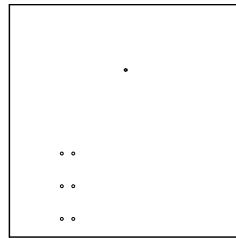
DRV5032-SOLAR-EVM Drill Drawing
